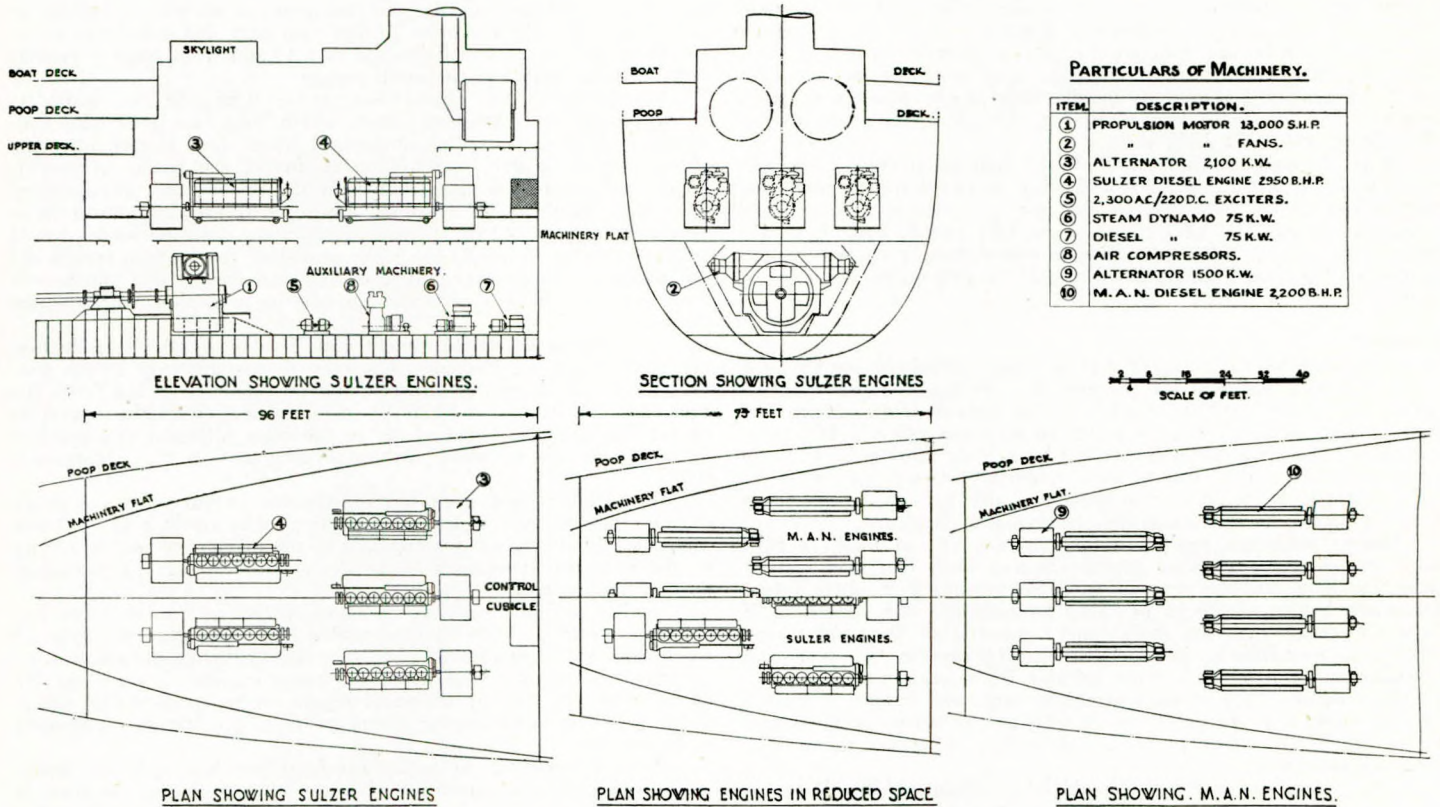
Arrangement of 13,000-s.h.p. propelling machinery in oil tanker.
